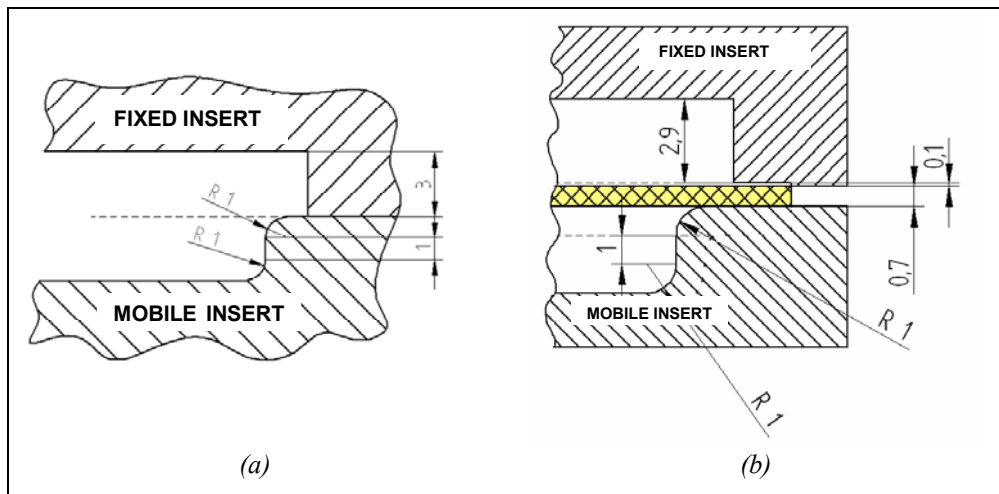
Fixed and mobile inserts clamped together: (a) without sheet metal blank; (b) with the sheet metal blank between them.
